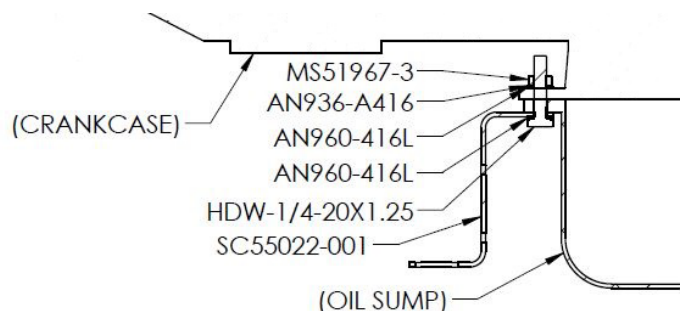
COIL BRACKET INSTALLATION (EARLY SNs)
